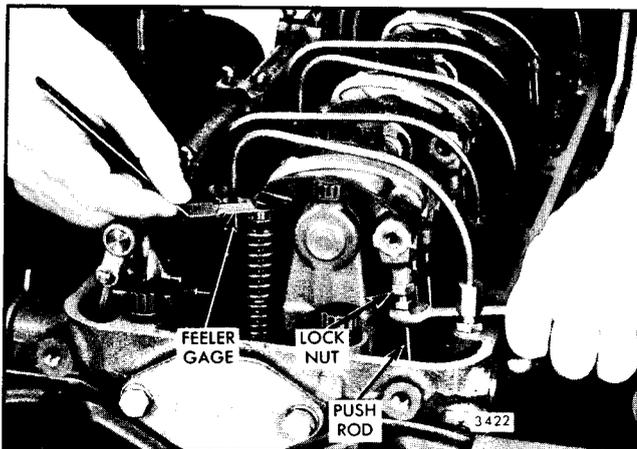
Adjusting Valve Clearance (Two Valve Head)
